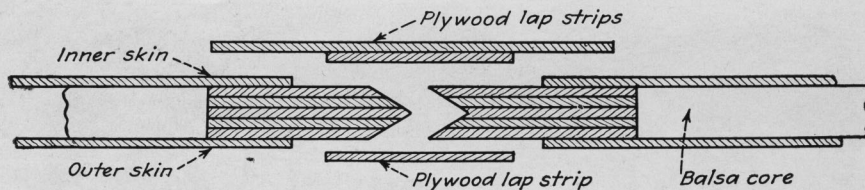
Details of the skin joint where fuselage halves are mated. Plywood lap strips are glued and screwed into the shell members.
